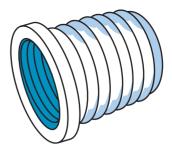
This solid-bushing insert is threaded on the outside, to grip the workpiece. The inner threads match the desired bolt size.
